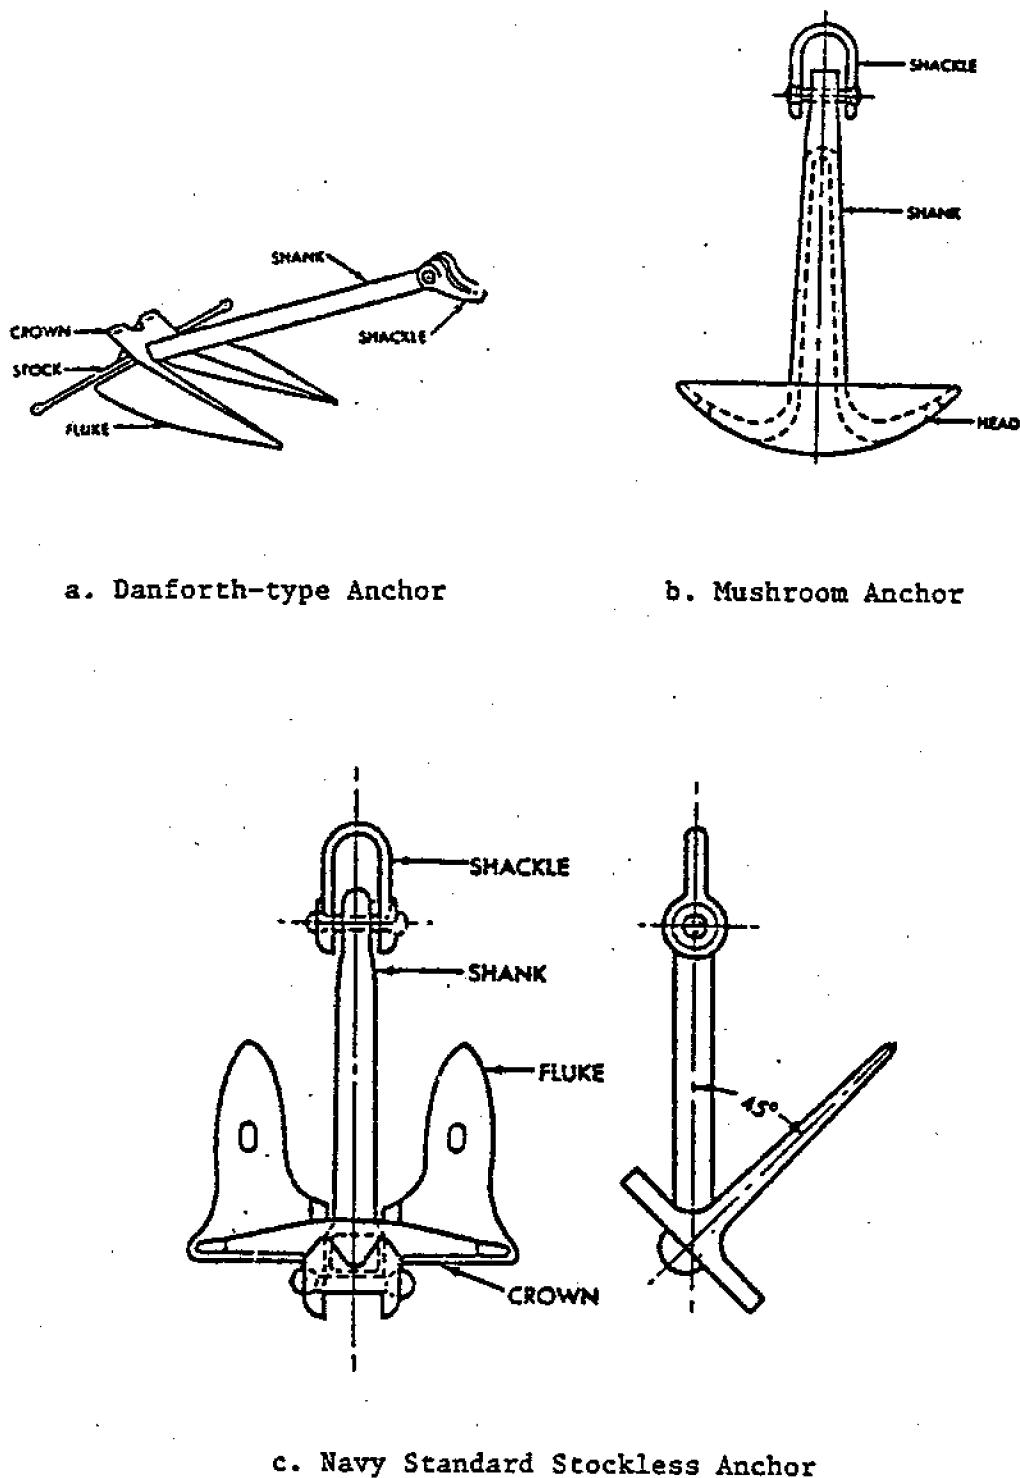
Soft Ground Anchor Types (Ehrlich and Kulhawy, 1982, p. 66)
